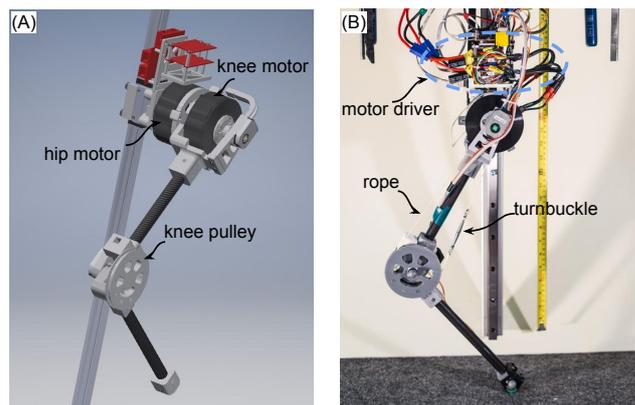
GURO robot. (A) CAD model (without rope and electronic parts). (B) A photo of assembled robot.
